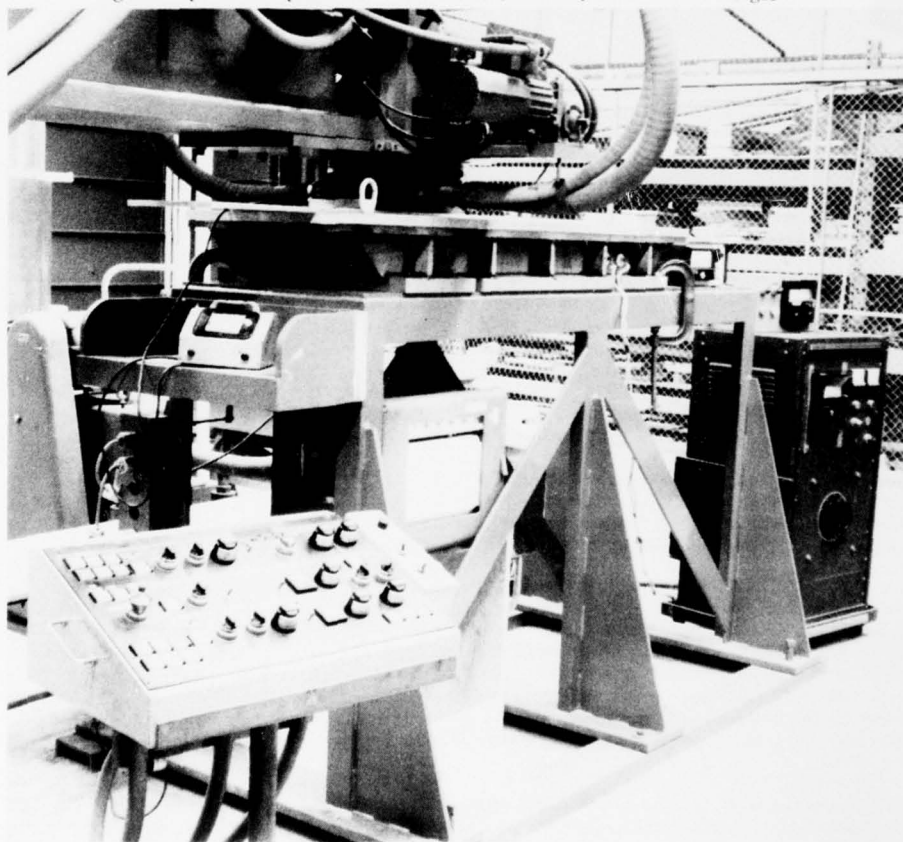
Preheat Steel Welding Fixture Setup Showing Variac Power Control and Strip Chart Recorder
